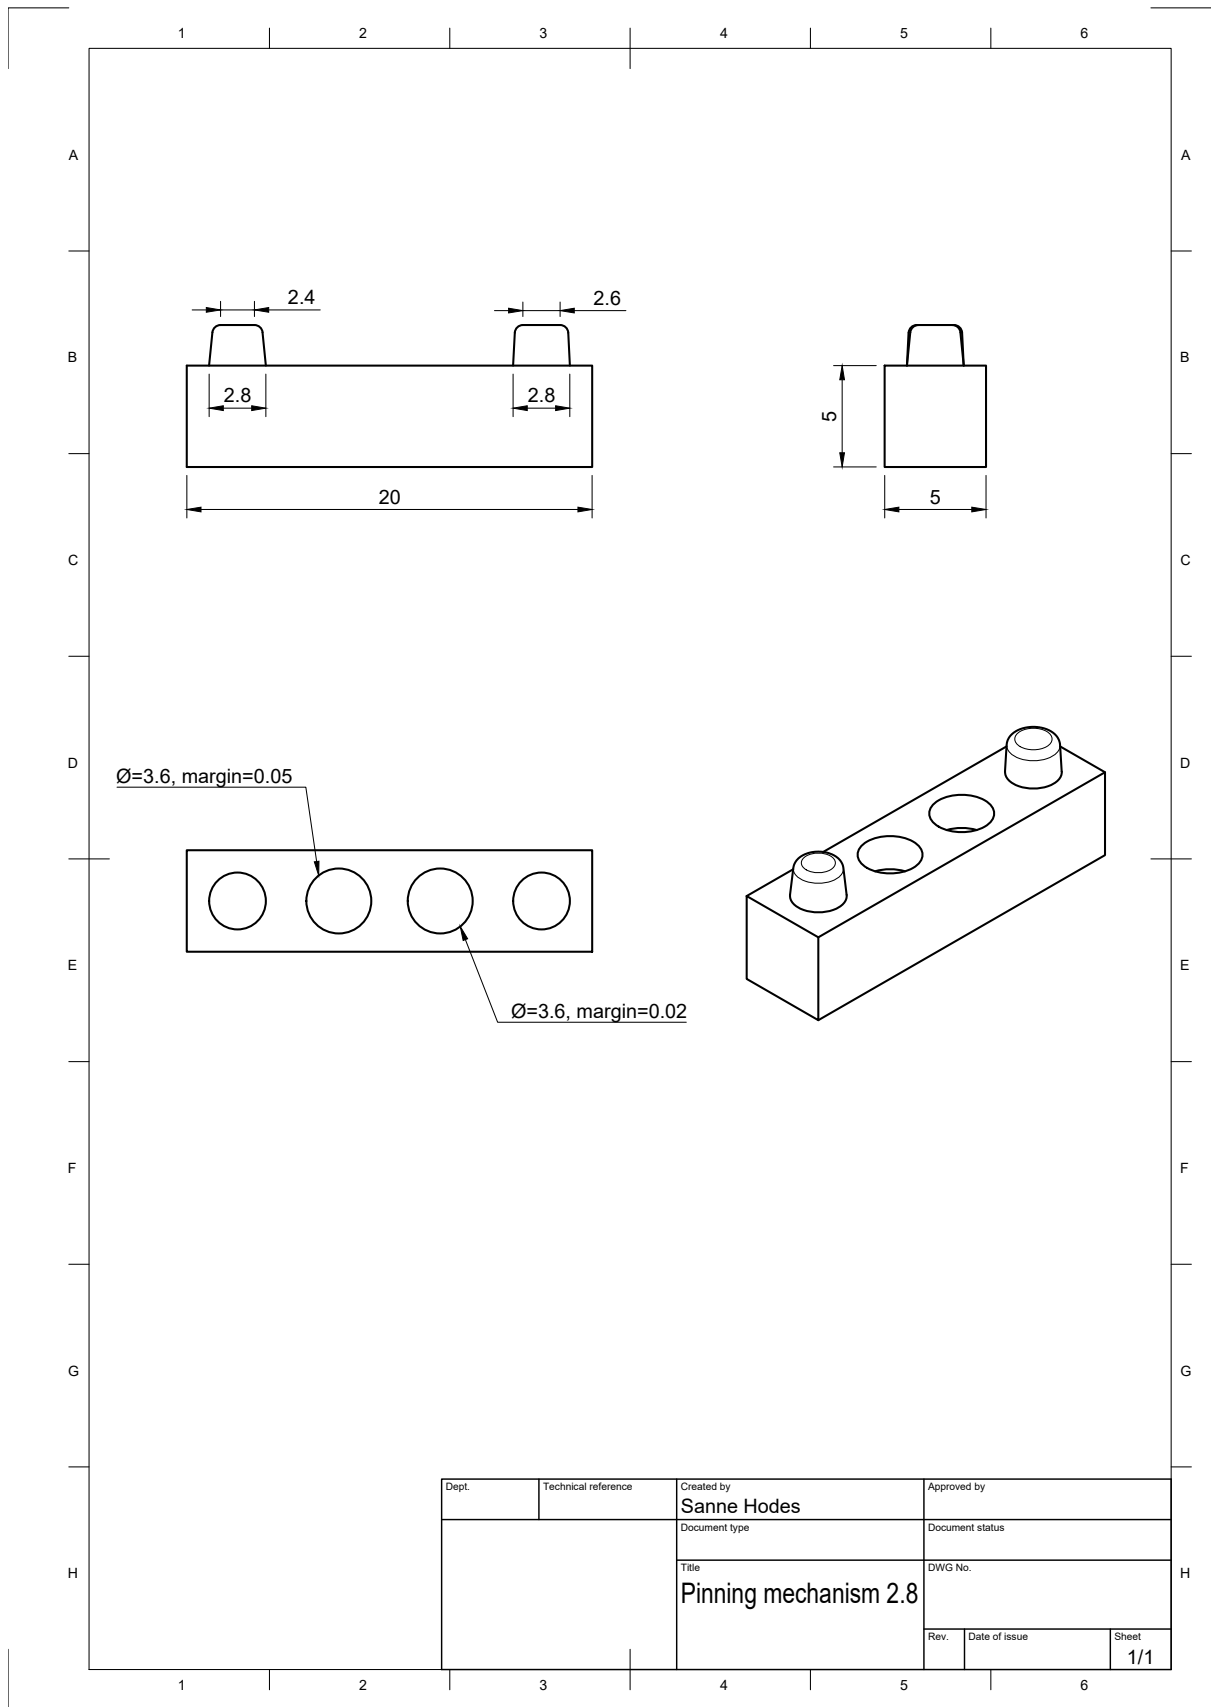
Technical drawing of the test cube for the pinning mechanism with the smaller pins
